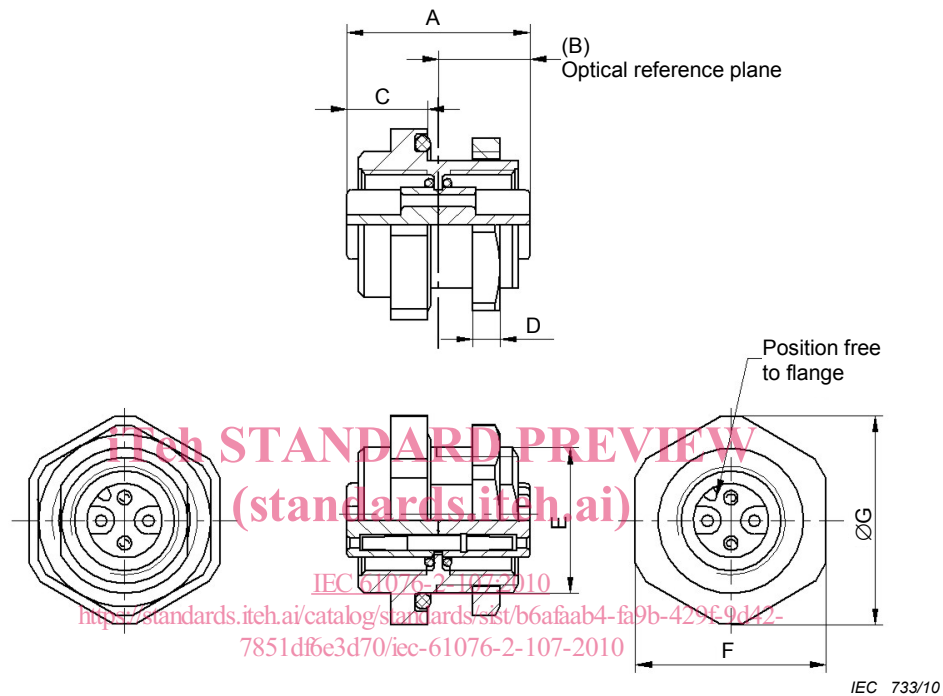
Fixed connector, electrical female contacts, single hole mounting thread M16 × 1,5, mounting orientation
